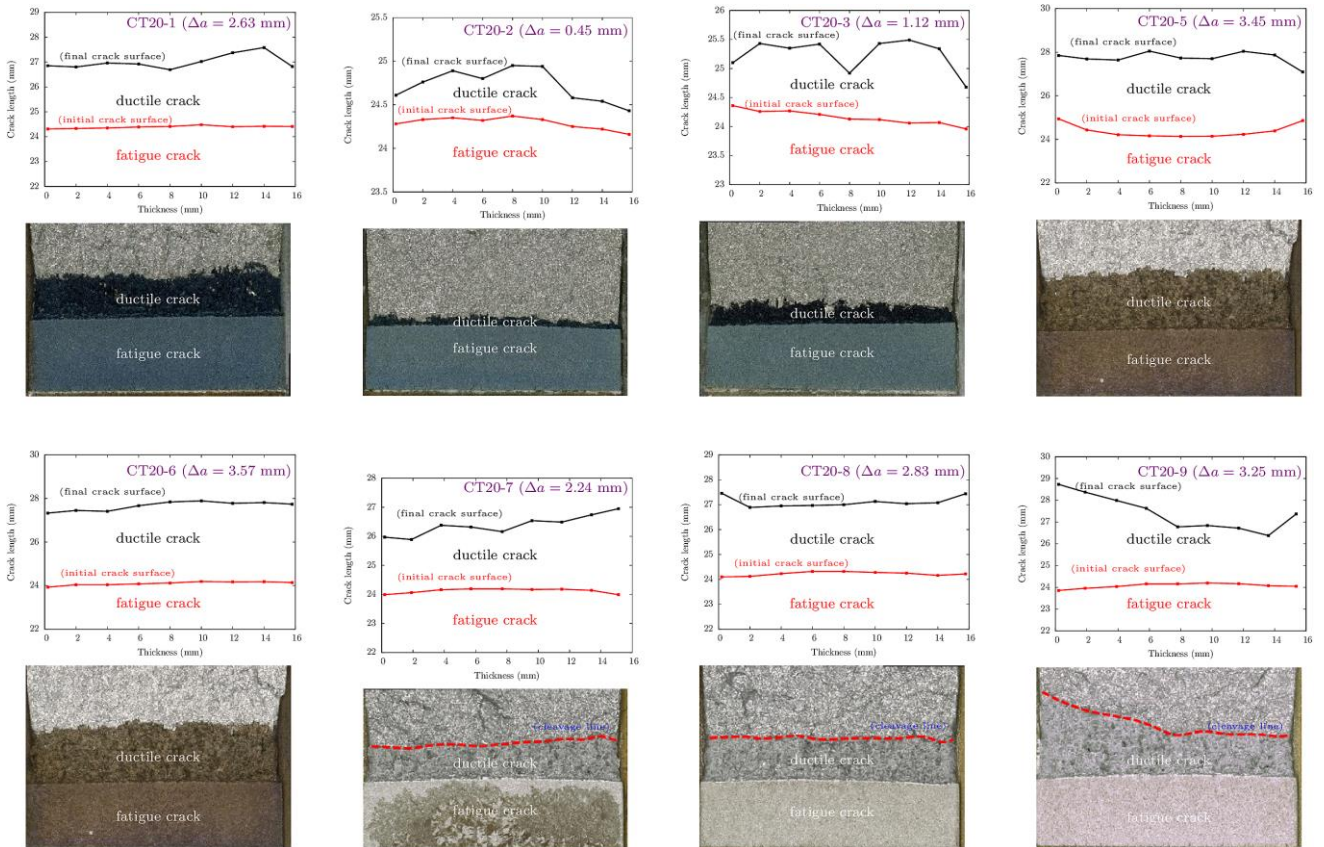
Fracture surface on ARMINES and EDF CT20 specimens
